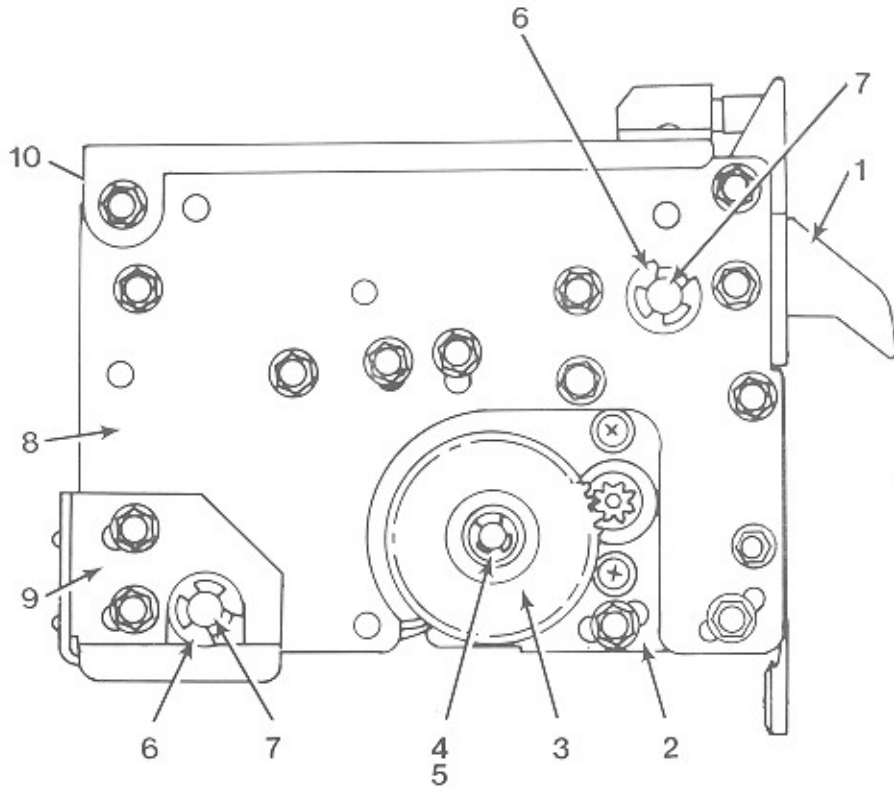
8. OBA-2 Transport Assembly, Sheet 3
